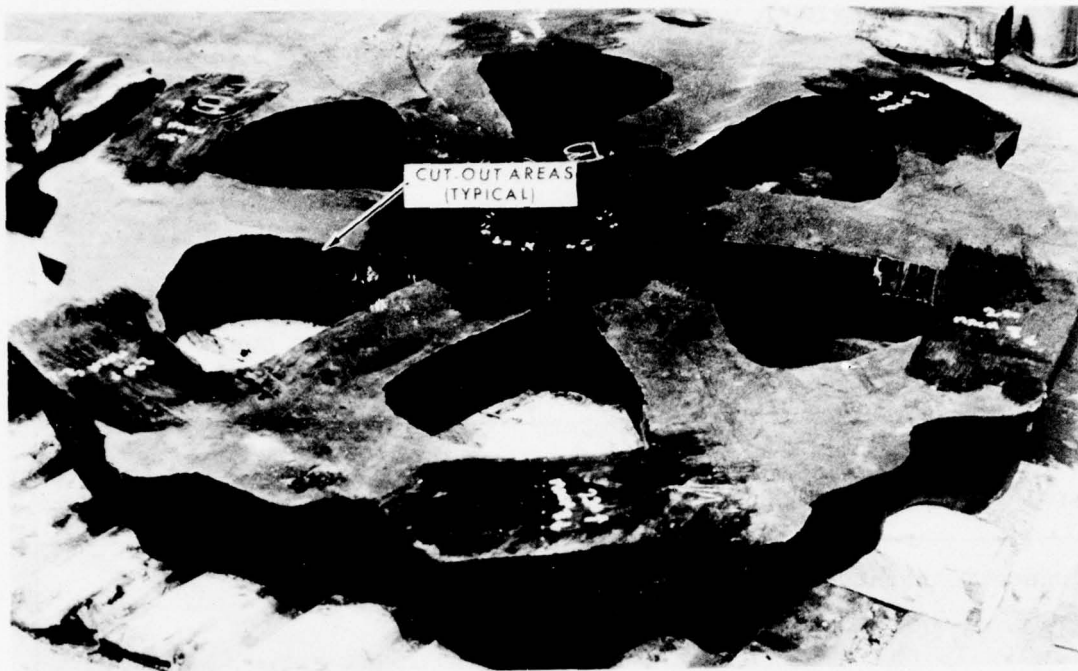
HALF-FORGING SHOWING CUT-OUT AREAS.
